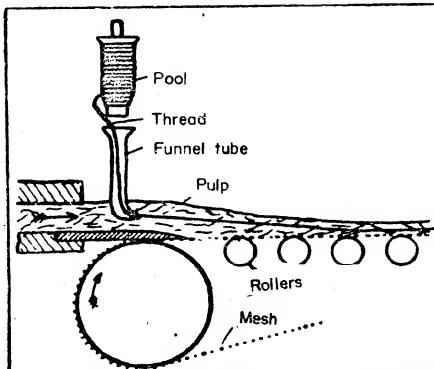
Diagram showing motion of pulp and injection of thread in paper-making machine producing paper with inlaid threads.
